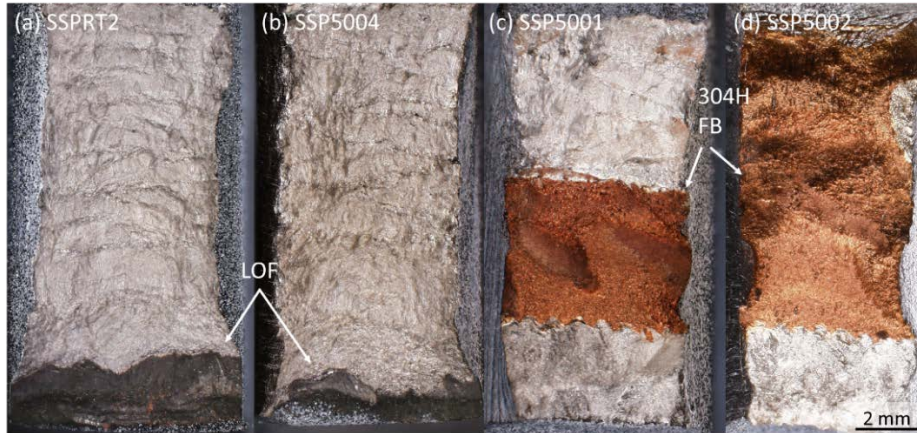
Fracture surfaces of (a) SSPRT2 and (b) SSP5004 showing LOF at C22 clad layer and (c) SSP5001 and (d) SSP5002 showing the fusion boundary (FB) fracture surface with orange oxide.
